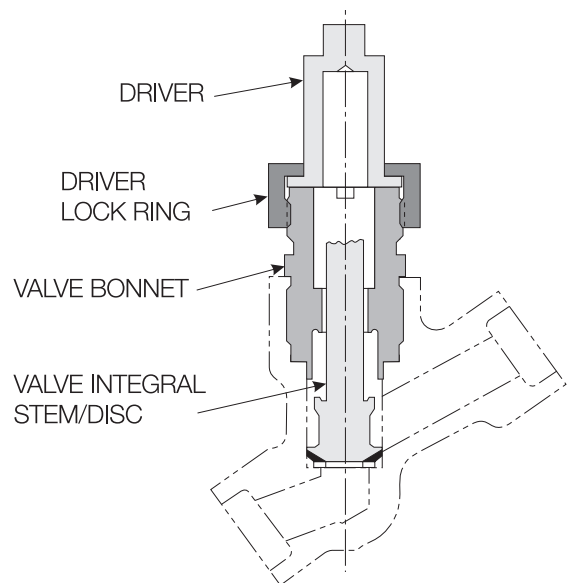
1/2 - 1" Bonnet Removal Tool Installed
